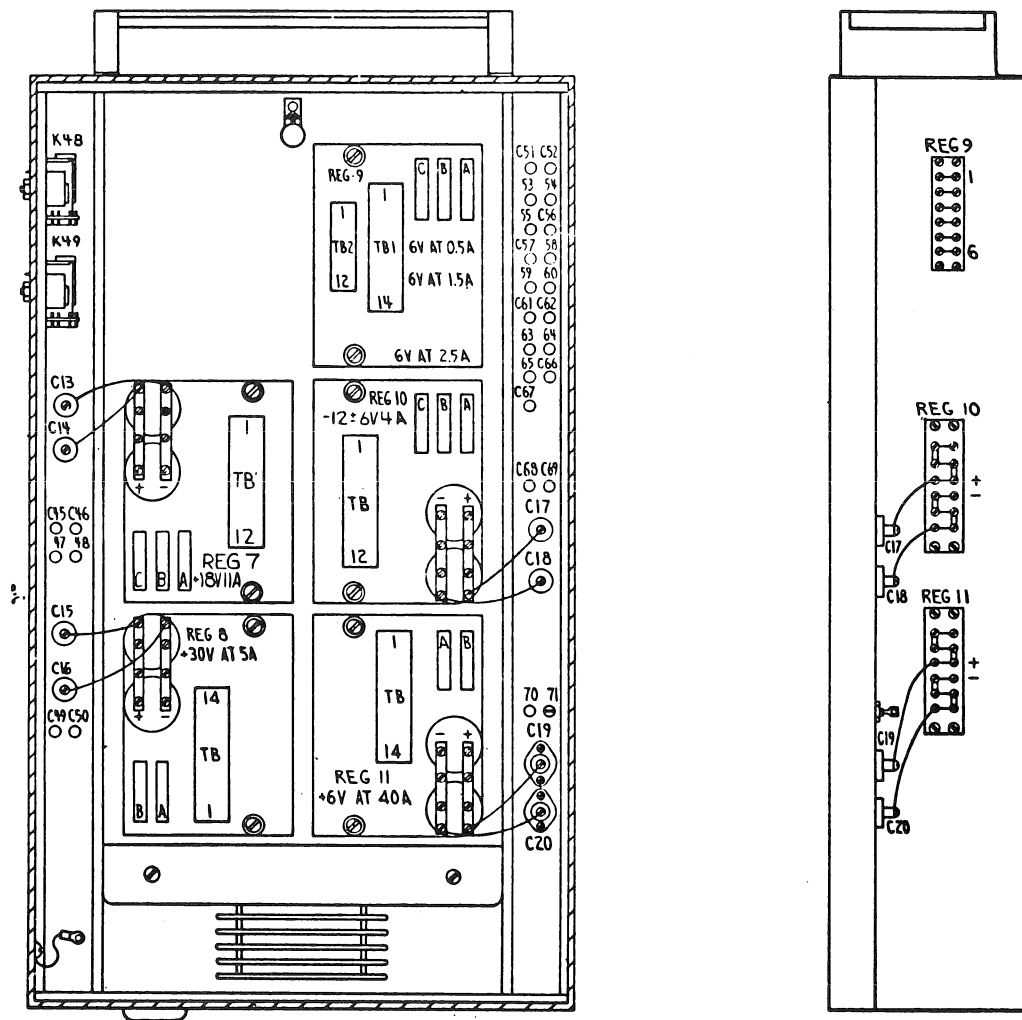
Power Supply and Regulator 7-11 Layout.
